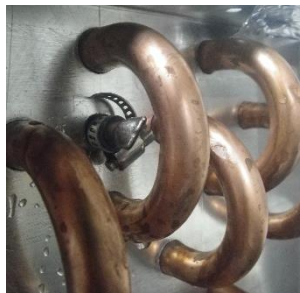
Sealed end of spray tubes using copper tube plug.
